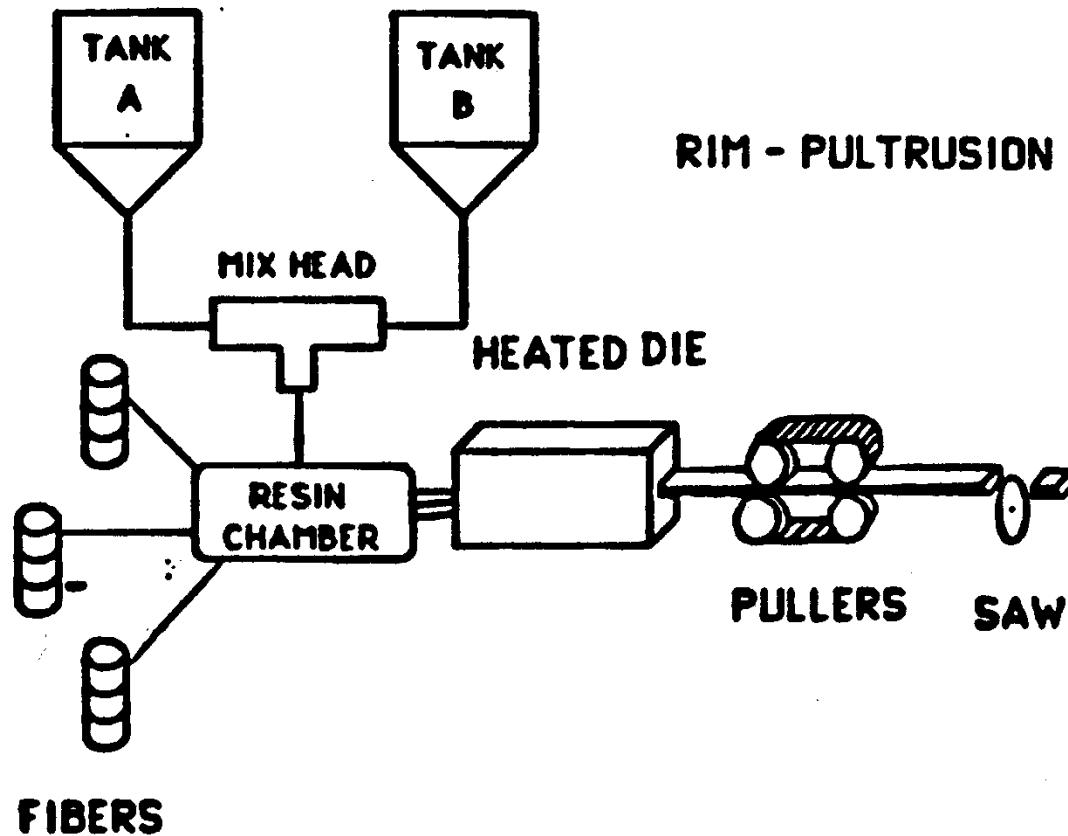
RIM (Reaction-Injected Molded) Pultrusion [3].
